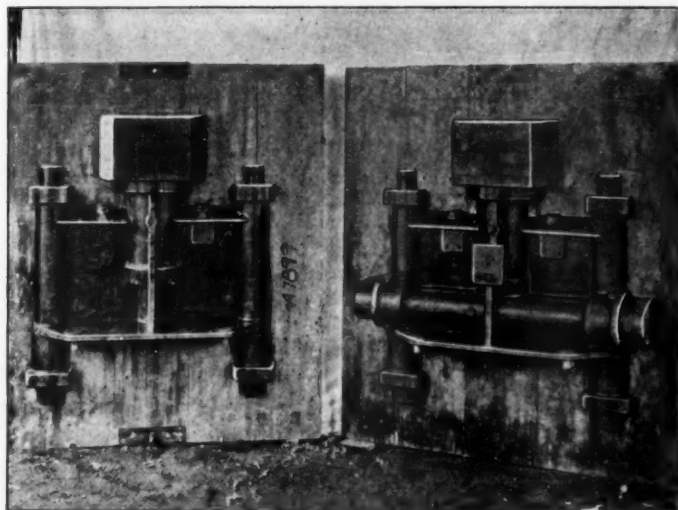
THE SAME PATTERN MOUNTED ON BOARDS FOR MACHINE MOLDING
